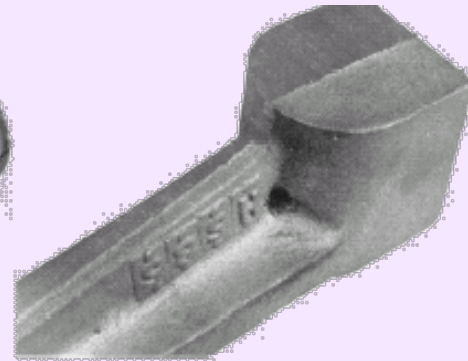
Common defects in sand castings: (f) mold shift
